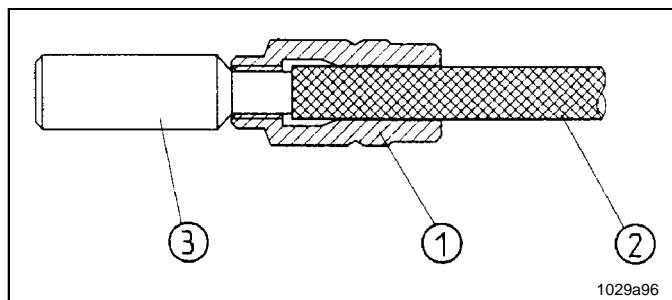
Preassembly of threaded sleeve by means of adjusting gauge
